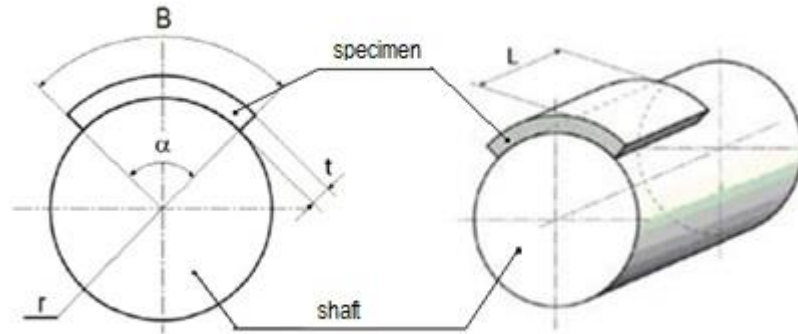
Dimensions of testing specimen:
